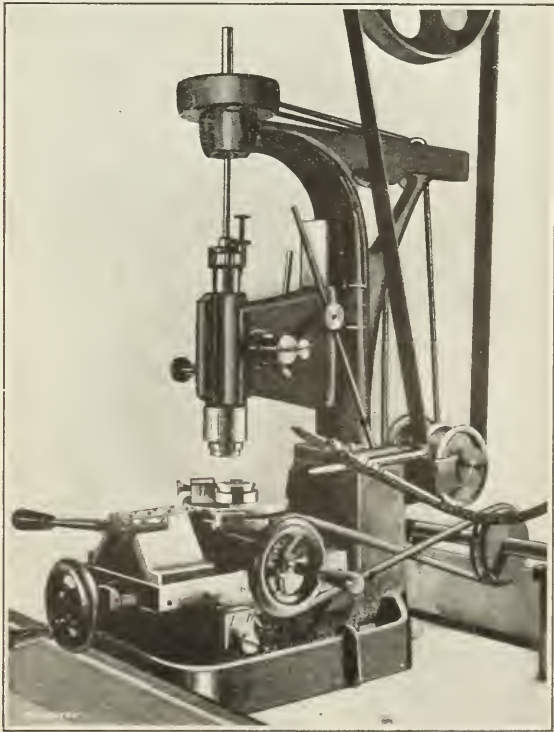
Leland-Gifford Bench Drilling Machine with Special Equipment for finishing Powder Train Groove
